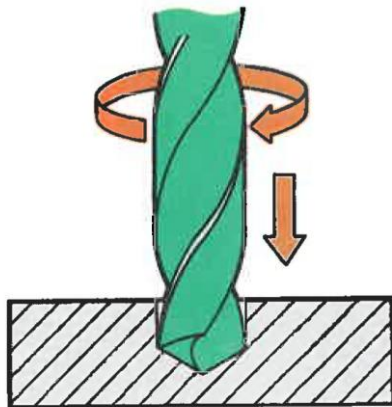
A drill press operates by rotating a cutting tool (drill) against the material with sufficient pressure to cause the tool to penetrate the material.
